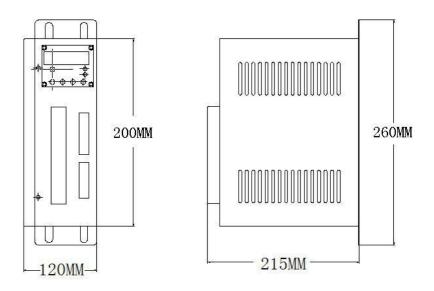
Outline Dimensional Drawings for the Servo Driver of 50A/75A
